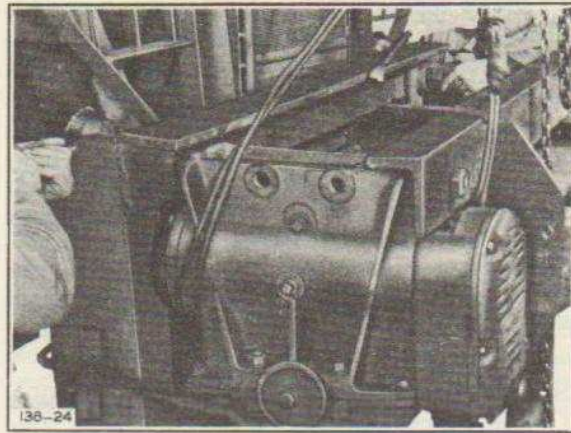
Winch in Place showing Large Bolts at Rear Being Inserted
